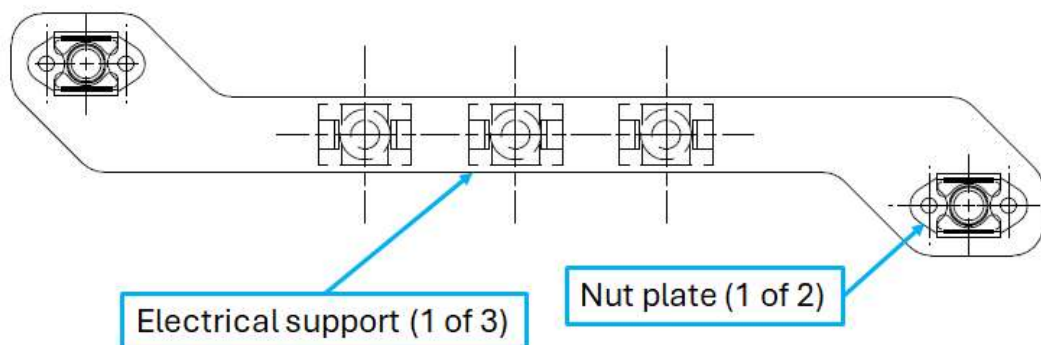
The single view of the left strip assembly in its manufacturing job card. (Courtesy of Leonardo, modified by NTSB)
